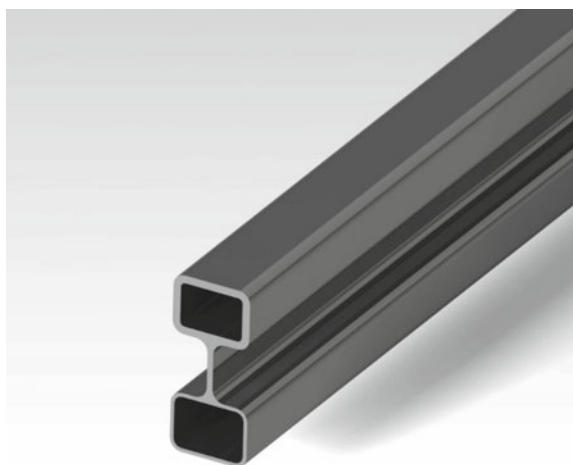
Primary FUMAS concept for the seat backrest structure based on friction stir welding of a magnesium and a steel assembly
